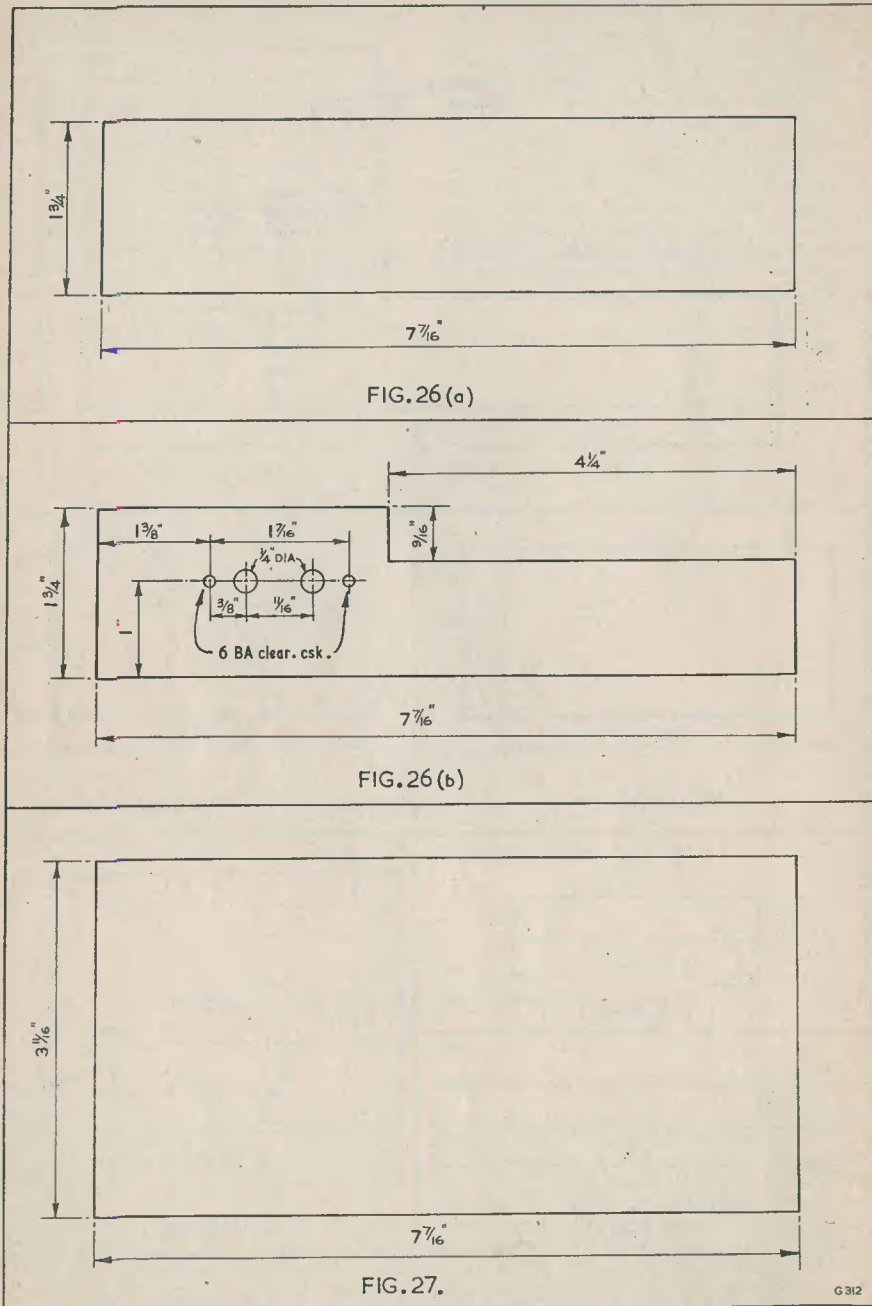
(a) and (b). The side sections. Fig. 27. The dimensions of the cabinet bottom
